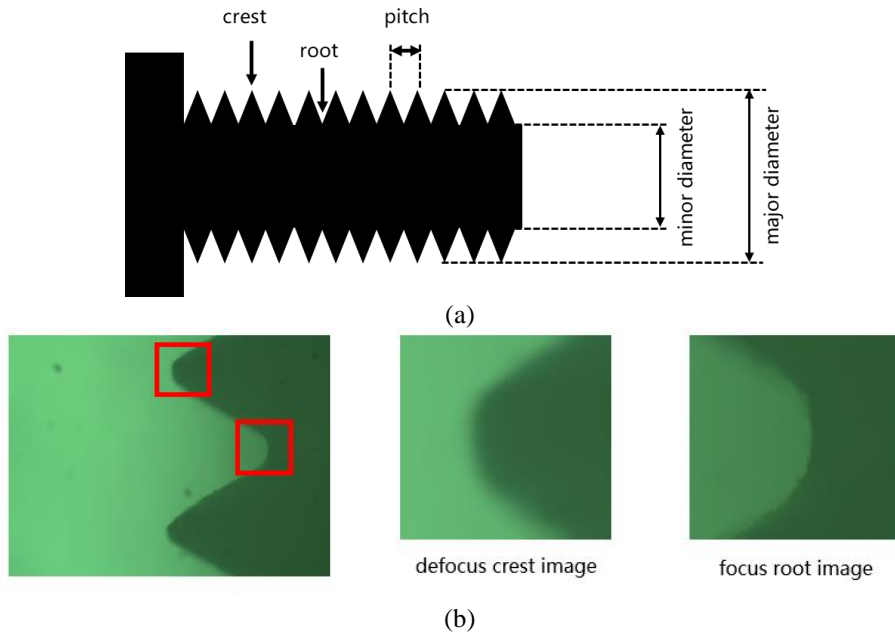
The schematic diagram of the bolt dimension measurement and the thread image.
